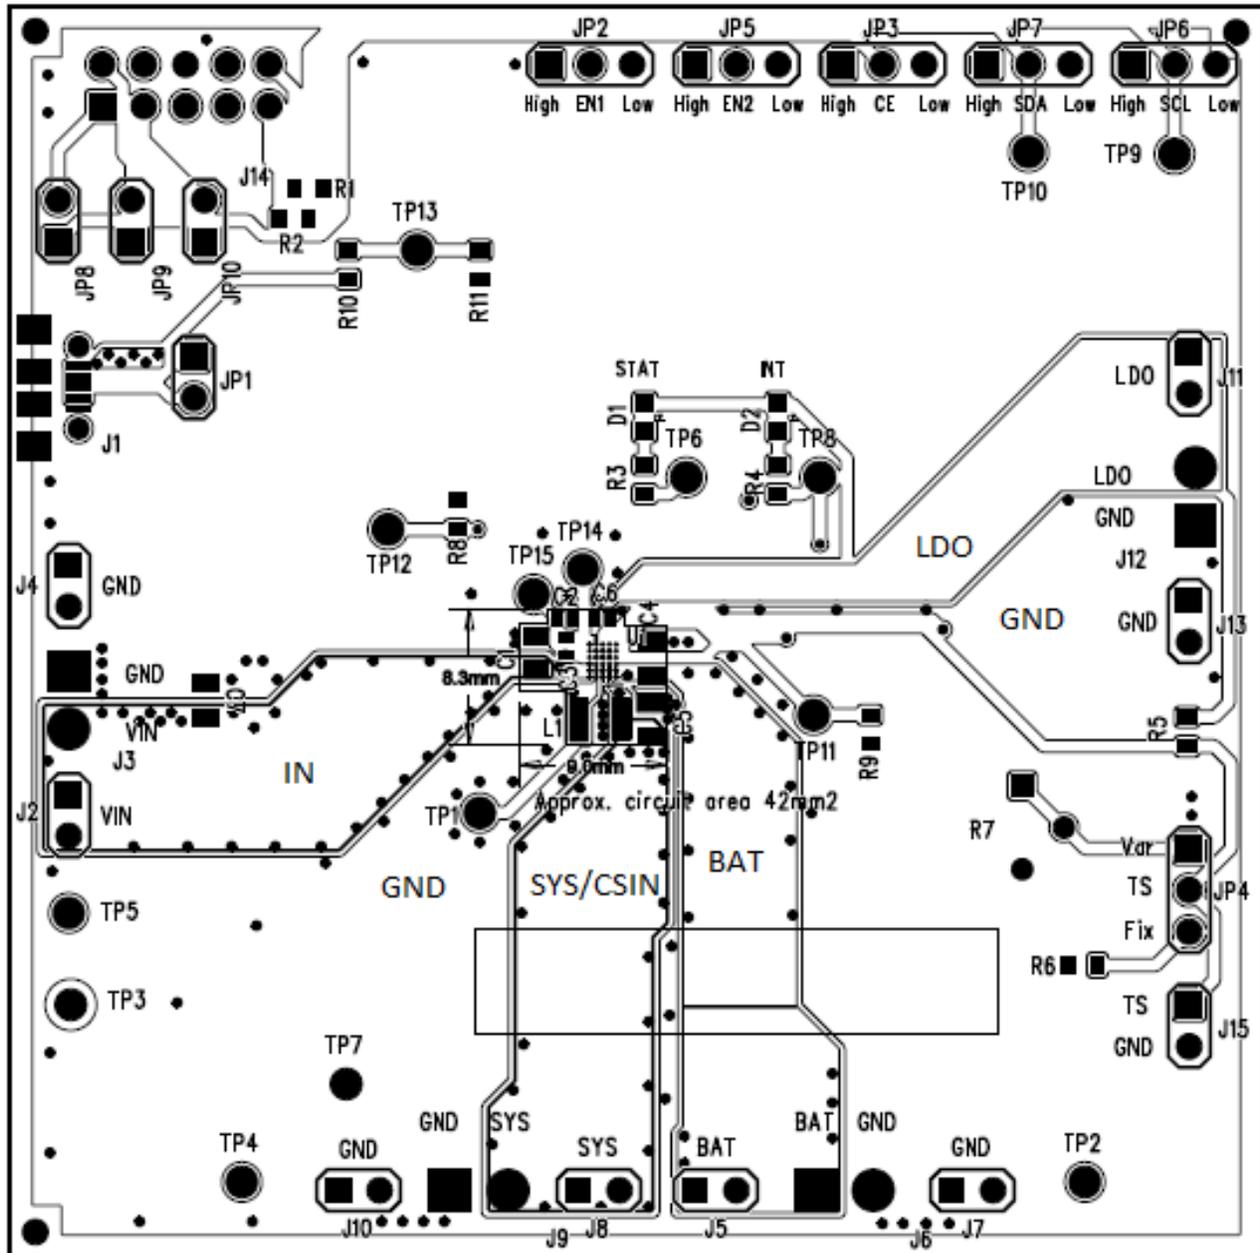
Recommended bq2425x PCB Layout for DSBGA Package
